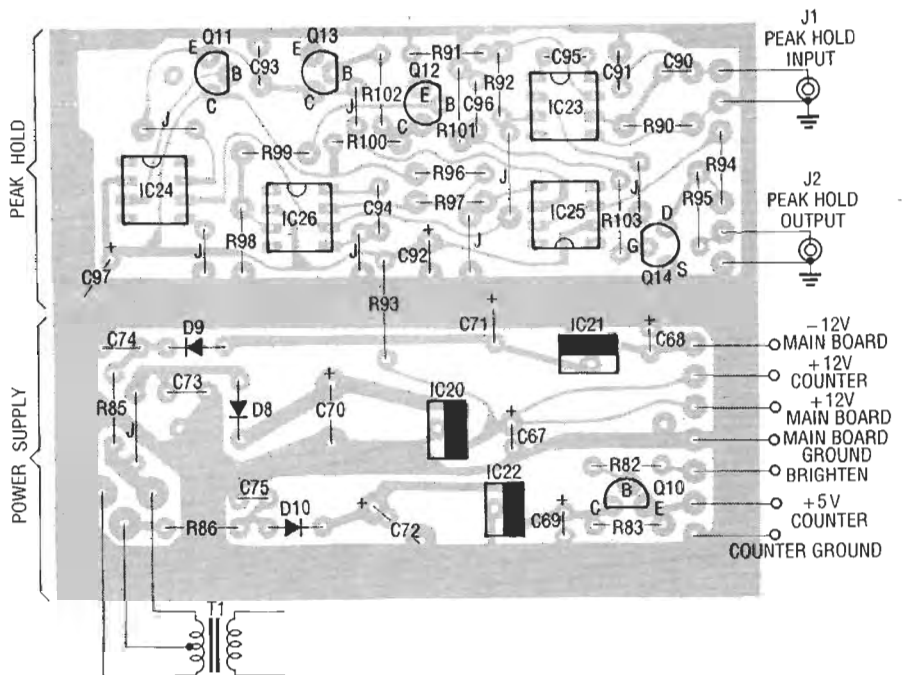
PARTS PLACEMENT DIAGRAM OF THE PEAK-HOLD and power supply board.
